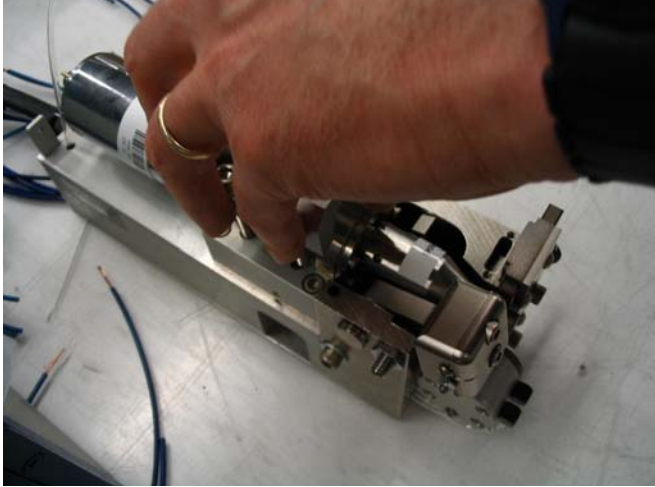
Exploded Ultrasonic Stack Assembly
